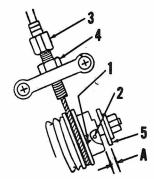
Clearance (A) between adjusting pulley and adjusting plate should be at least 0.006 inch.
